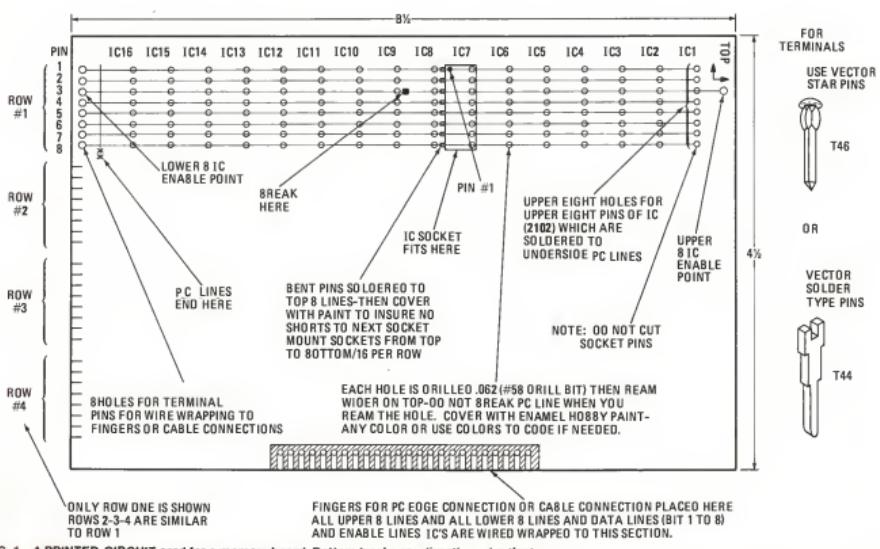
A PRINTED-CIRCUIT card for a memory board. Bottom tracks are directly under the top ones. The trick here is to solder pins on one side of each socket directly to the upper tracks.
